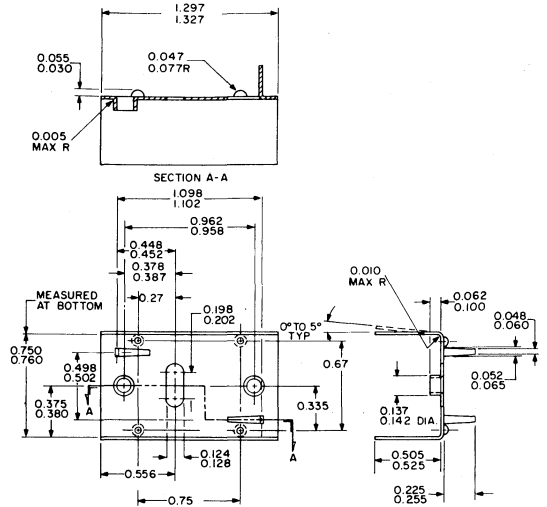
Dimensional outline of Versawatt transistor package designed for mounting on printed-circuit boards.
